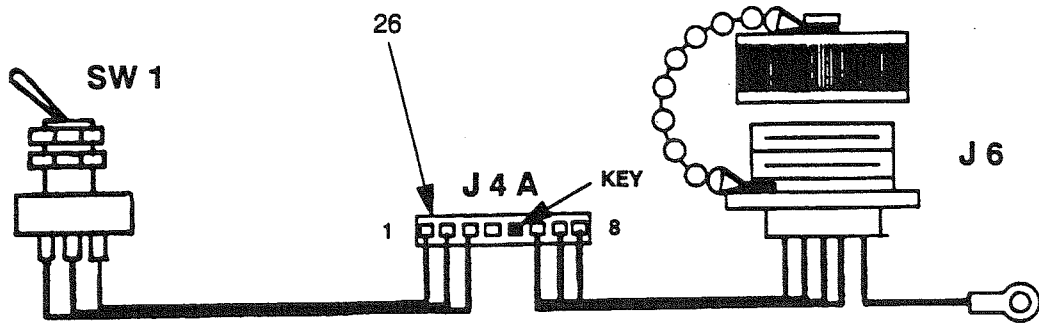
EPS Interconnect Assembly Part No. 27788-304
